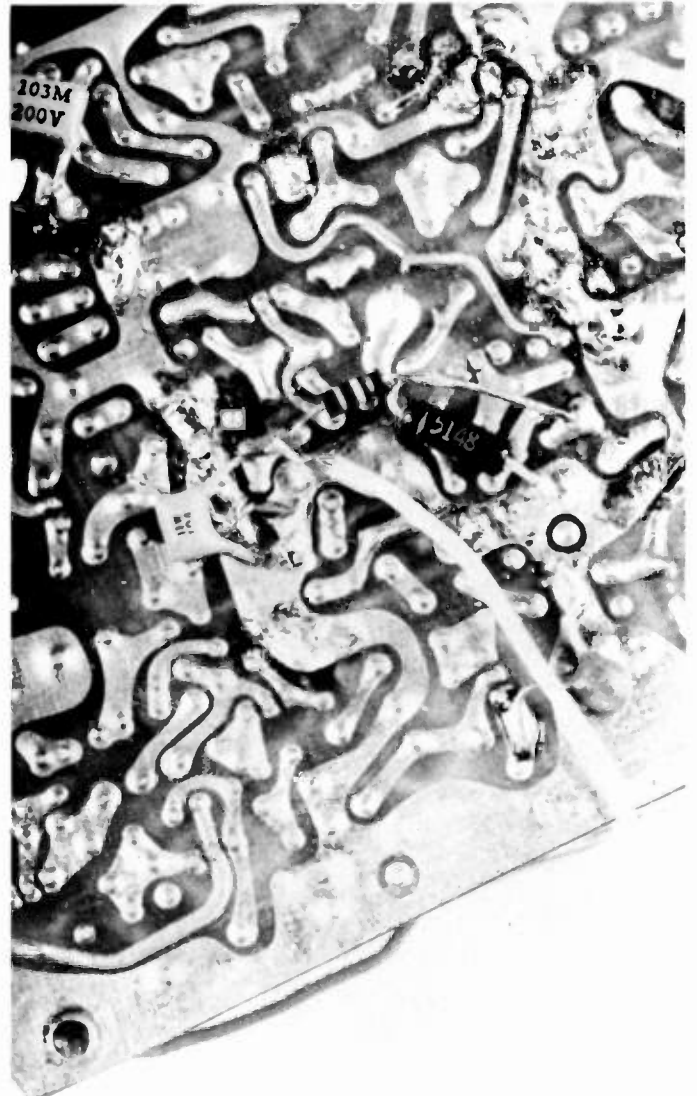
Mounting of the varactor diode, C1', and R1' on the receiver board.
